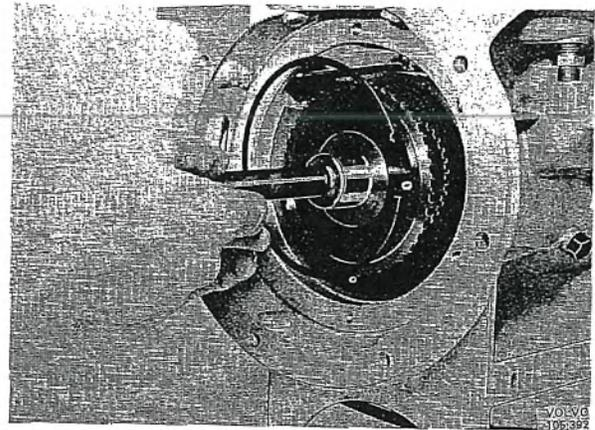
Installation sequence, front clutch snap ring, input shaft and thrust washer
